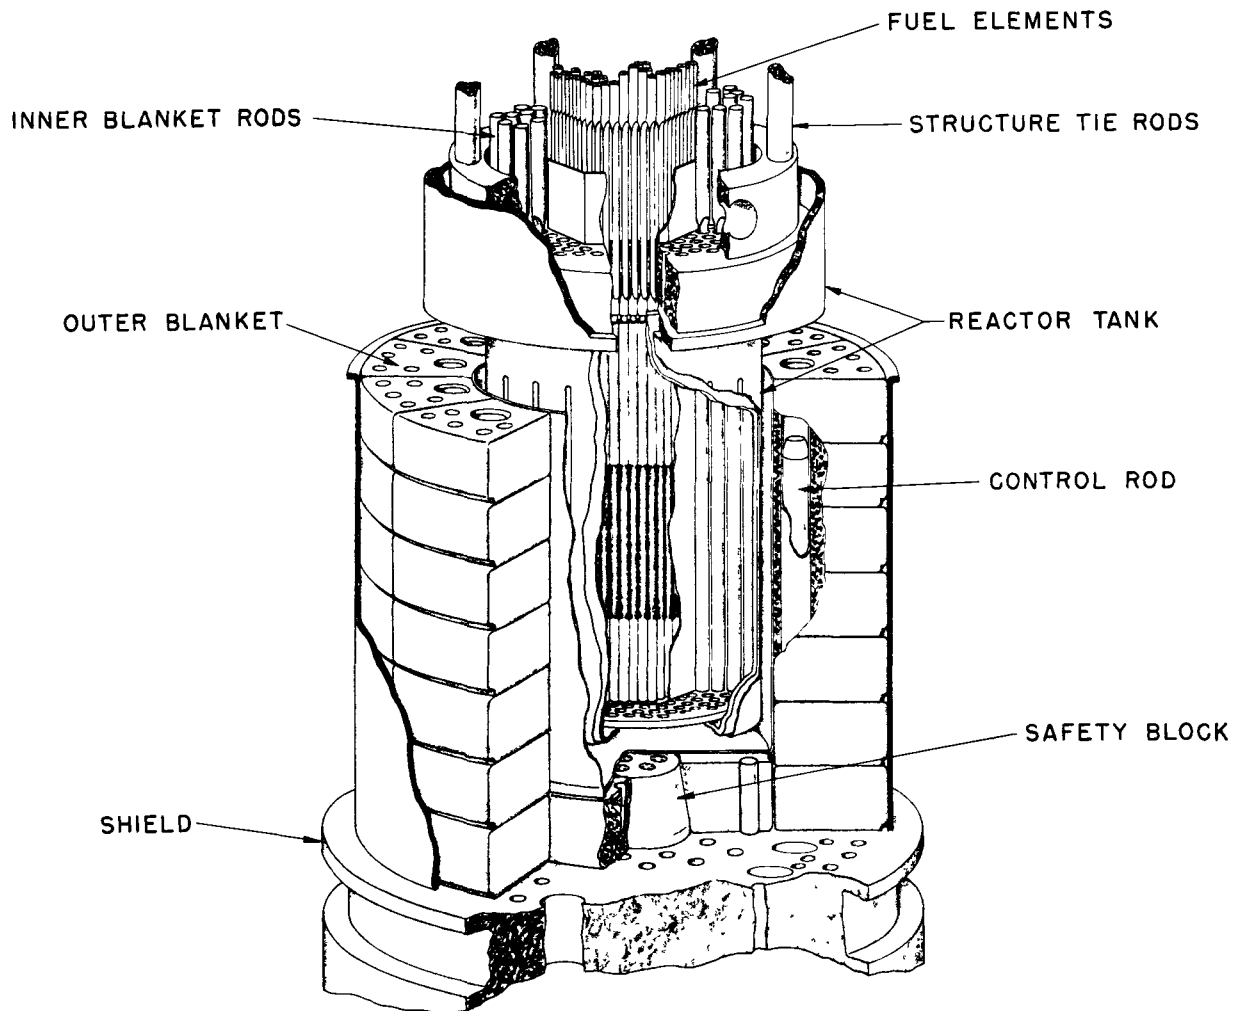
Cutaway View of EBR-I, Mark II Reactor
